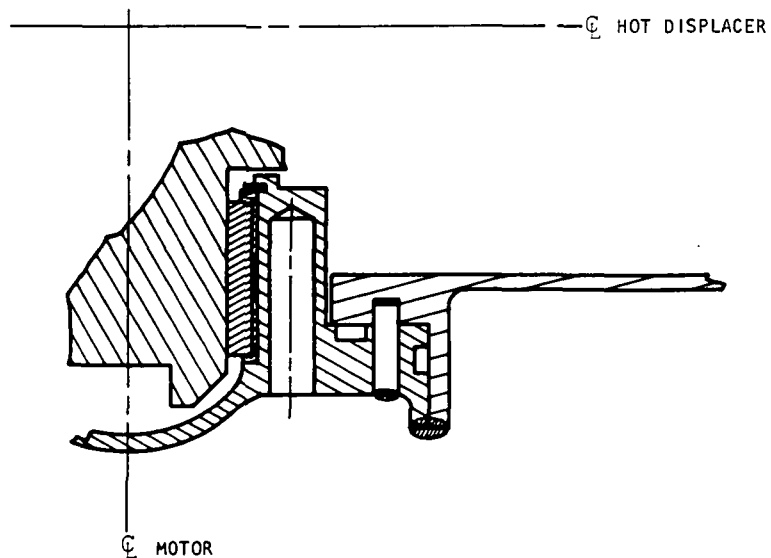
Bayonet Type Lock--Crankshaft Closure Dome
